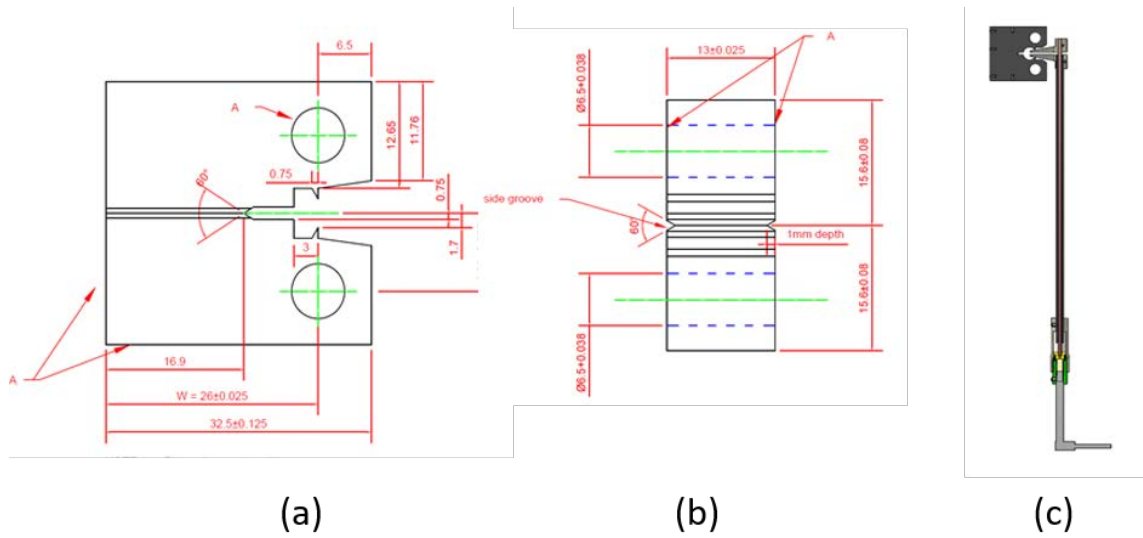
(a) and (b) Schematic drawing of CT testpiece for creep crack growth tests and (c) shows how does an extensometer is attached to the testpiece.
